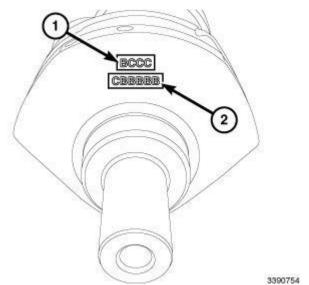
Bearing Identification & Letters Stamped Into Crankshaft Courtesy of CHRYSLER GROUP, LLC
